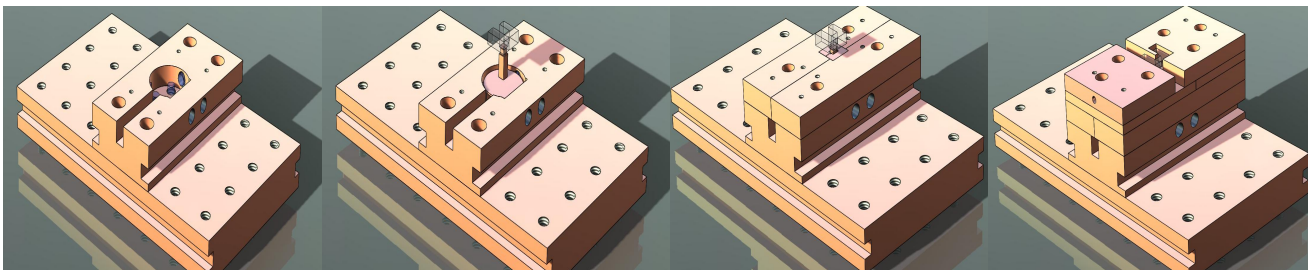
Assembly sequence of the clamshell surrounding the cooled assembly.
